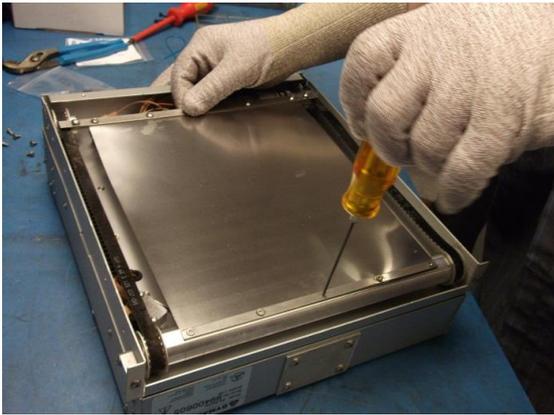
Install Curtain to Roller Bar with five 2-mm Retaining Screws
